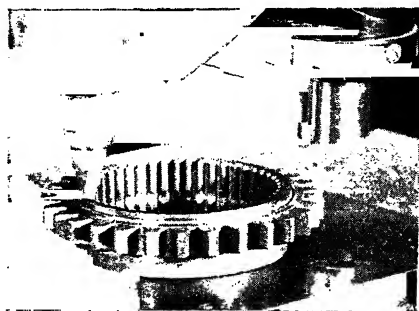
The diamond-pointed tool of an optical hardness tester being pressed into a sample pinion.
